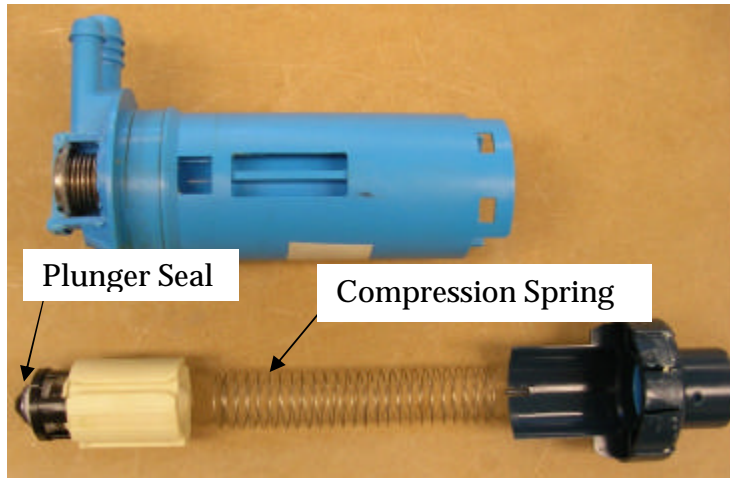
Ford Mustang fuel vapour valve - disassembled.
